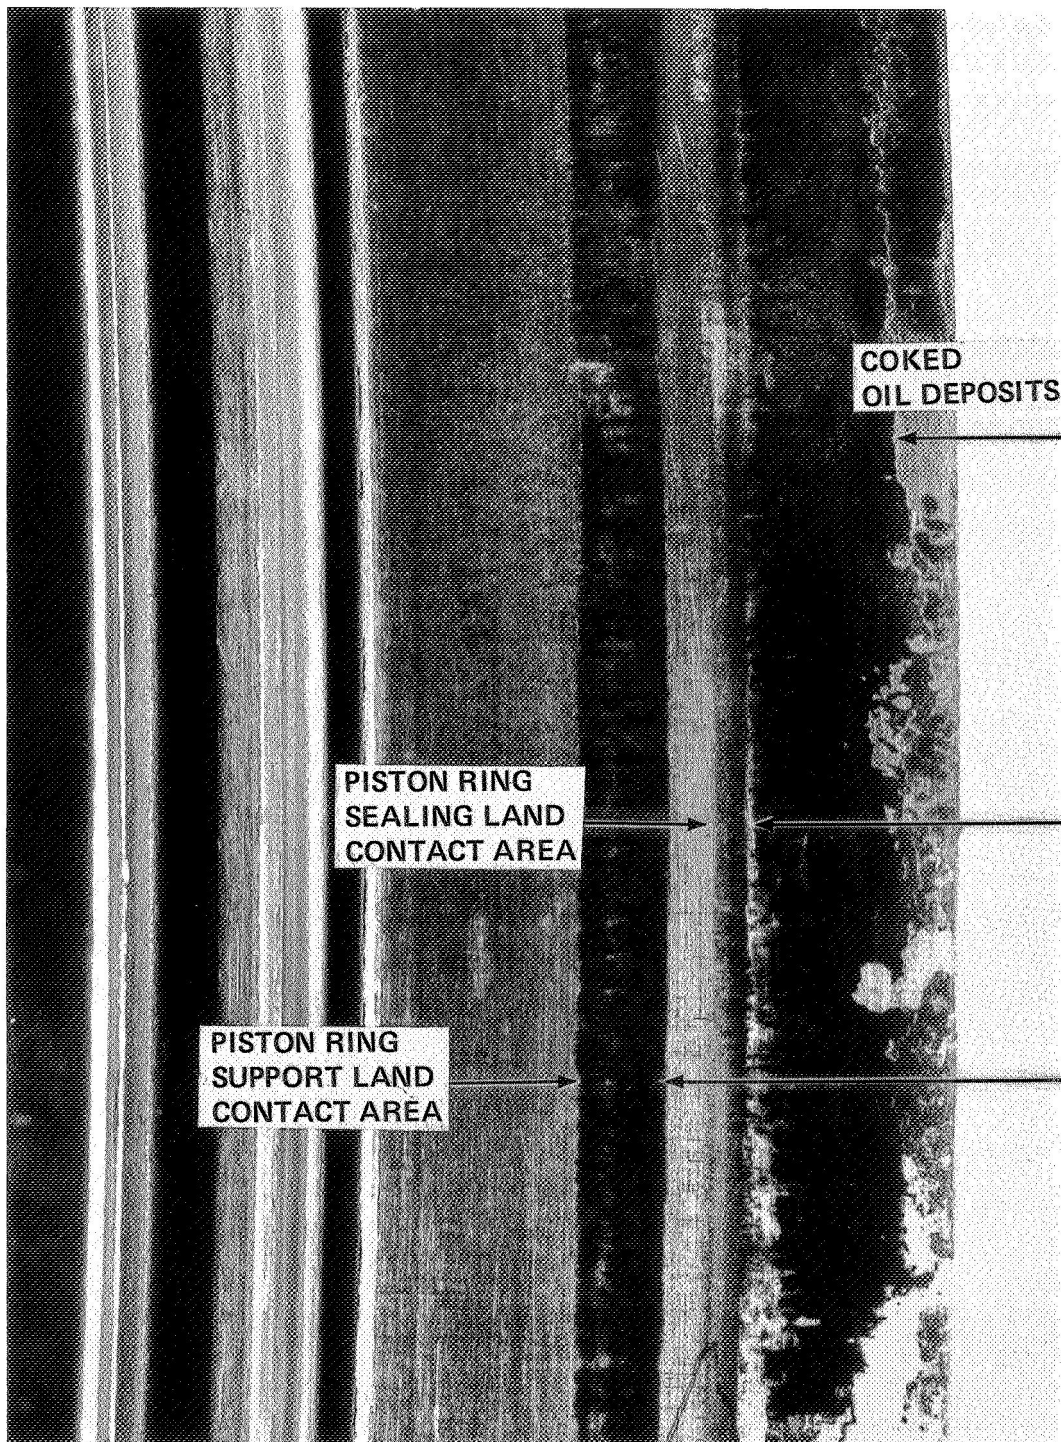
6X View of Carrier Piston Ring Bore Surface (XPN-6466)
